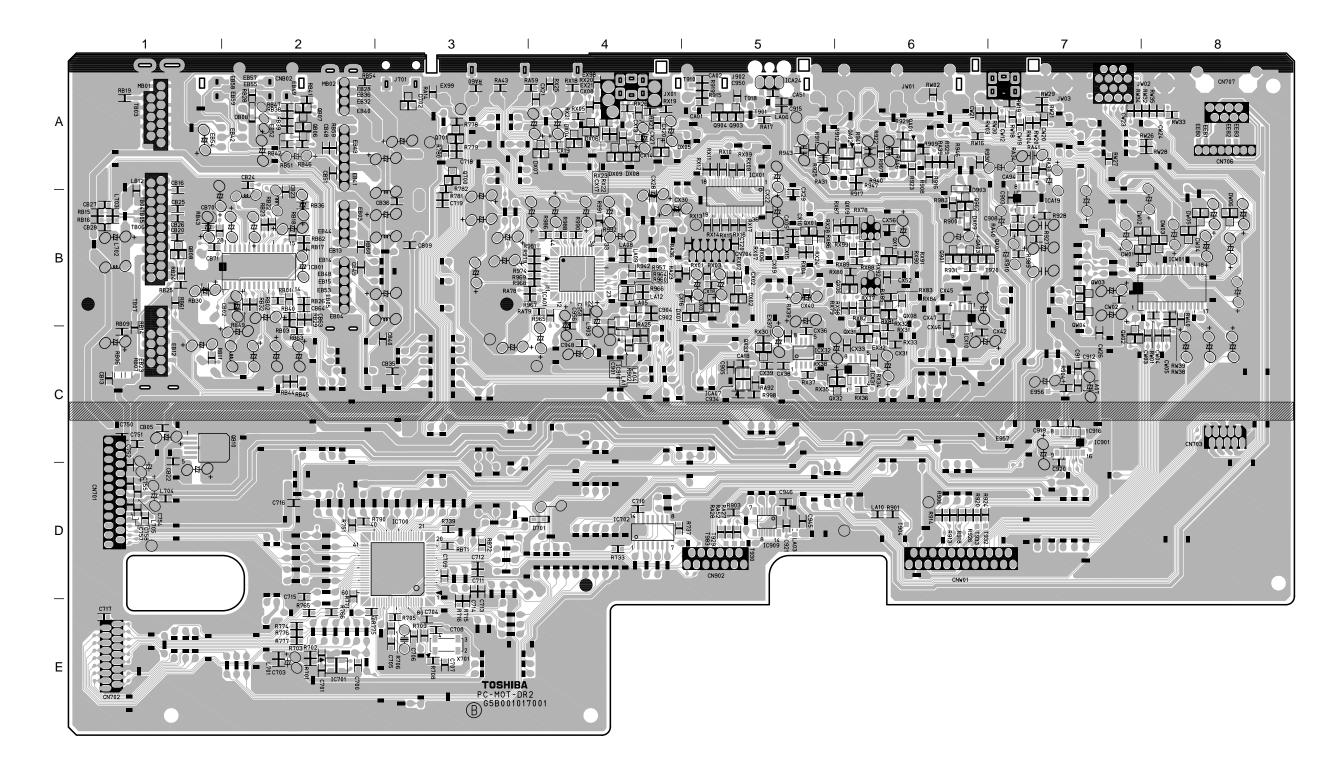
EU05 Mother PC Board (Bottom side)
